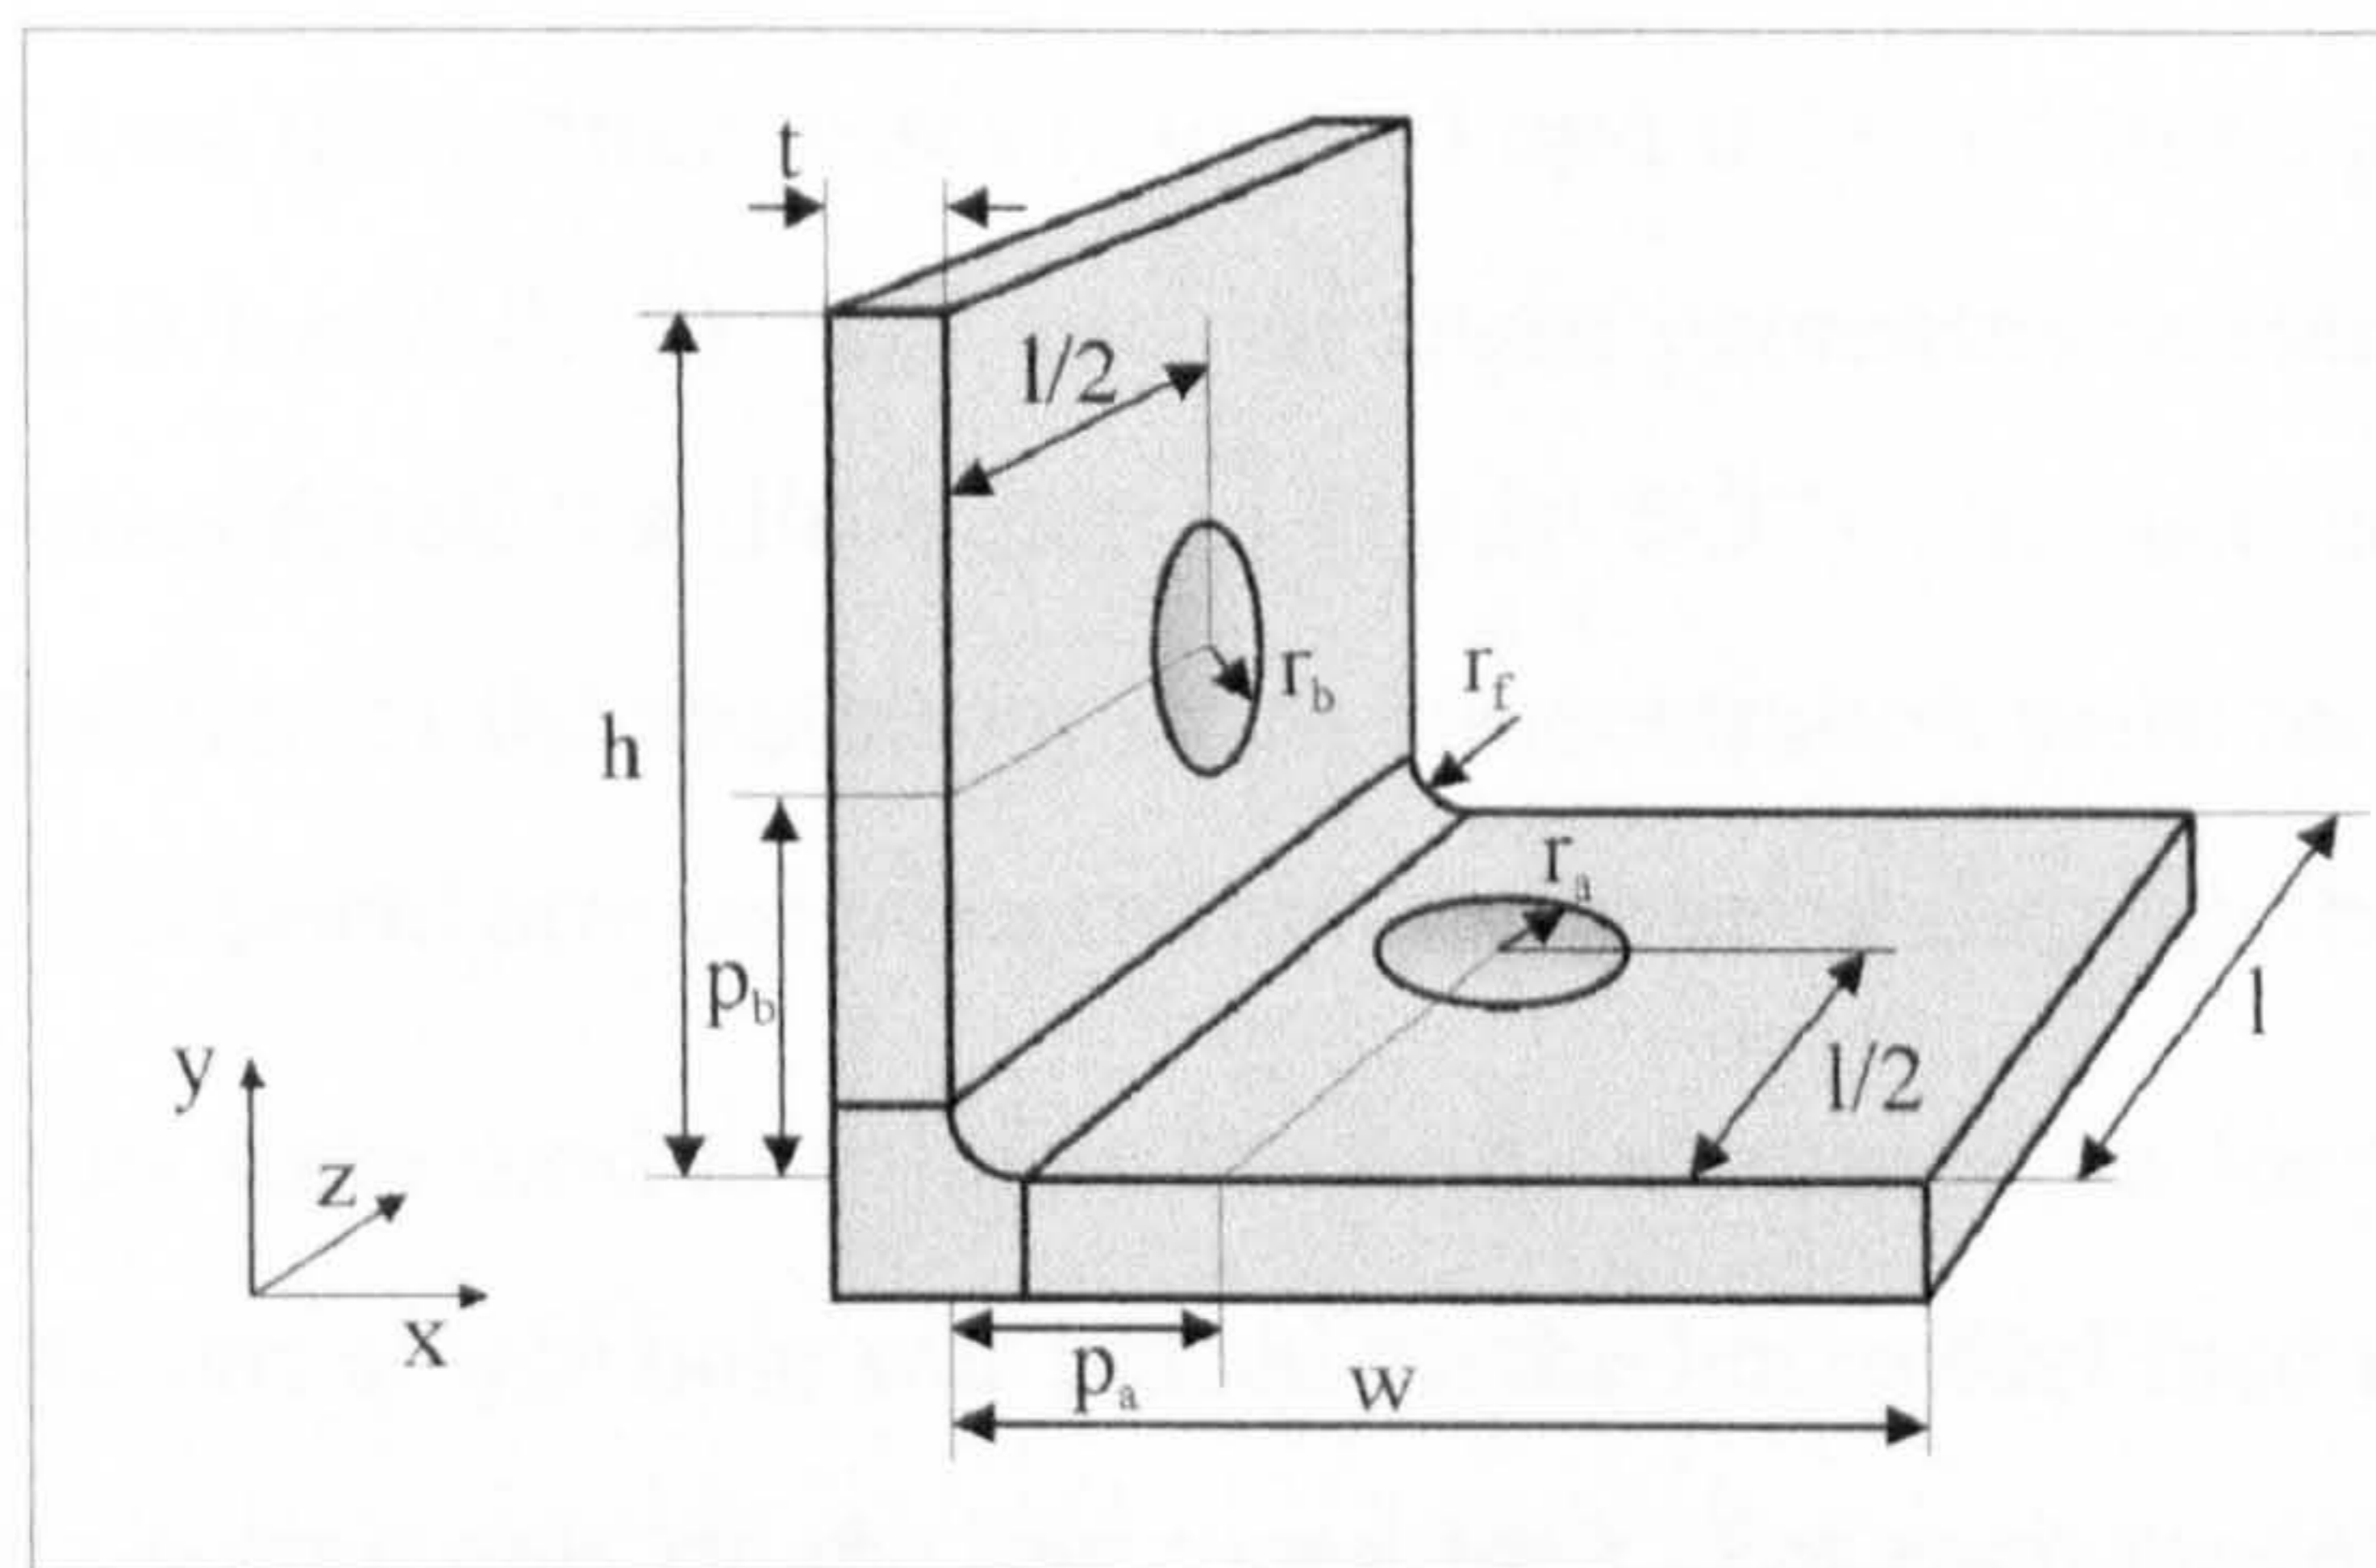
The geometric parameters involved in the three-dimensional problem of two holes in opposite faces of a radiused L-section
